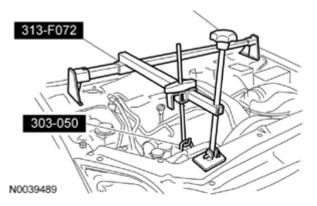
Lifting Engine Using Engine Support Bar And Engine Lifting Brackets Courtesy of FORD MOTOR CO.
